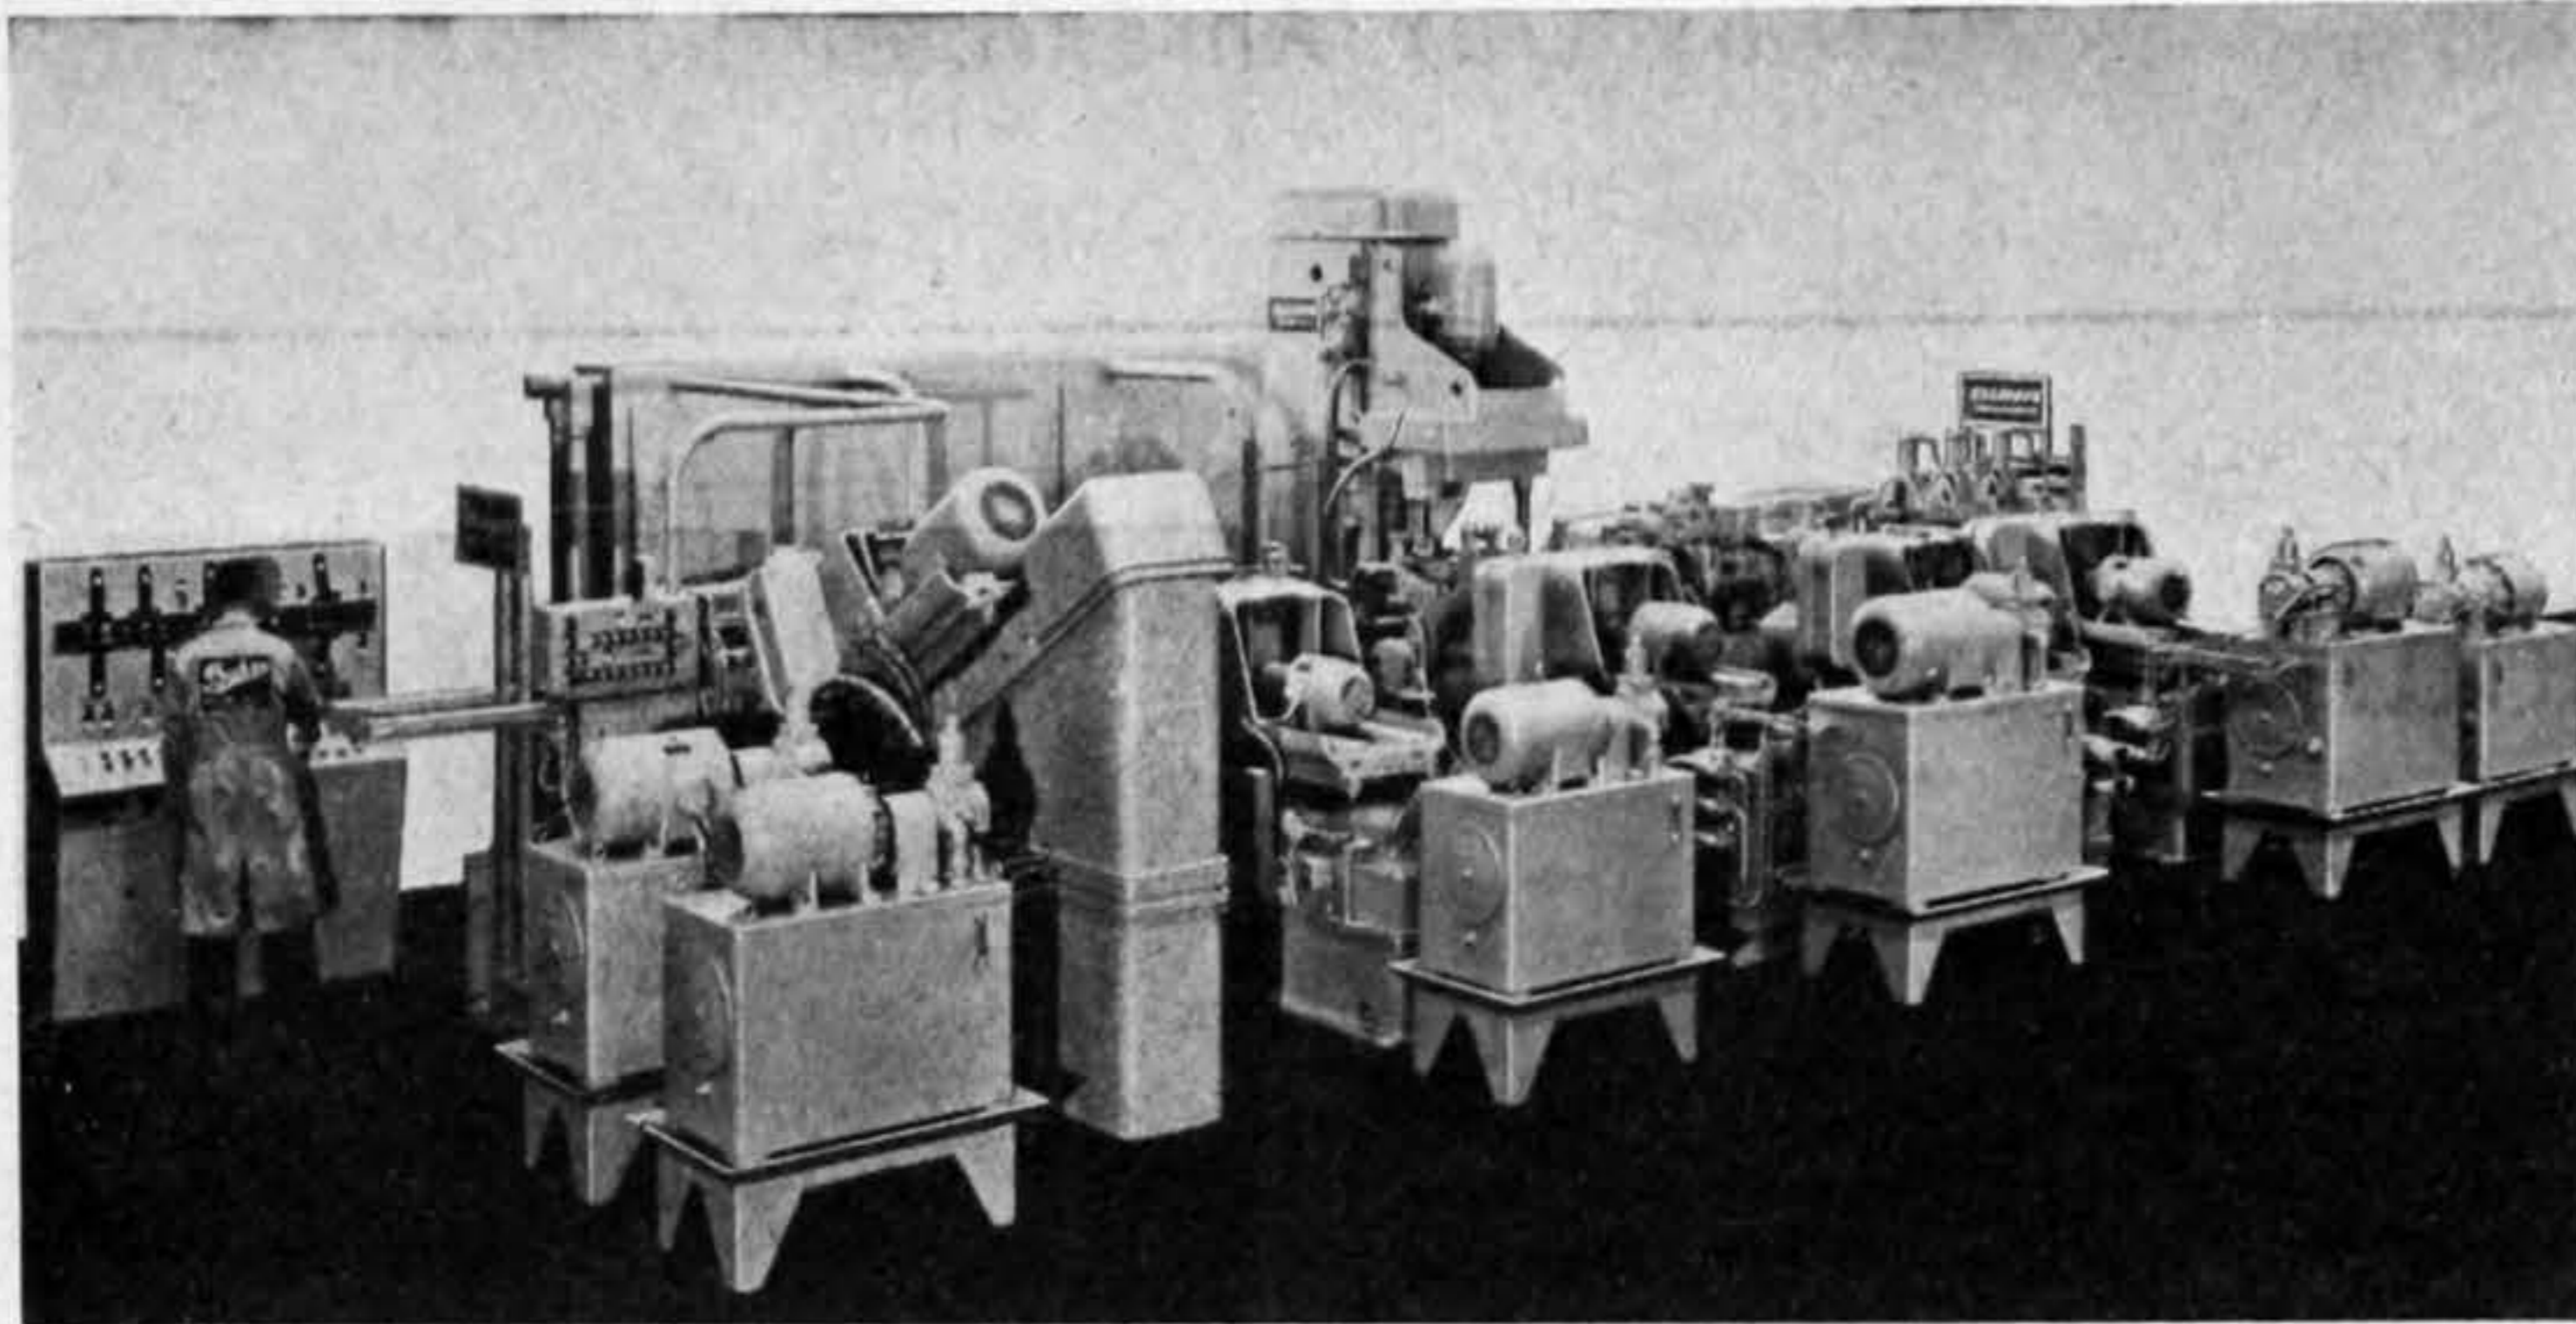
"Economatic" seventeen-station transfer machine for machining die-cast aluminium cylinder heads
